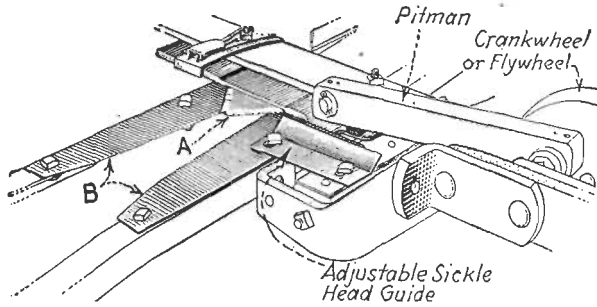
Cutting mechanism of corn binder: A, sickle; B, side knives.
